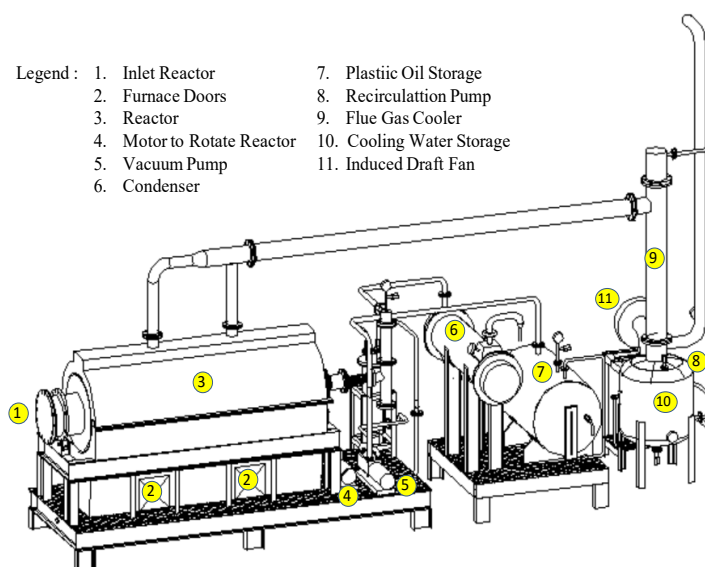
3 - Dimensional Drawing of the Plastic Oil Plant
